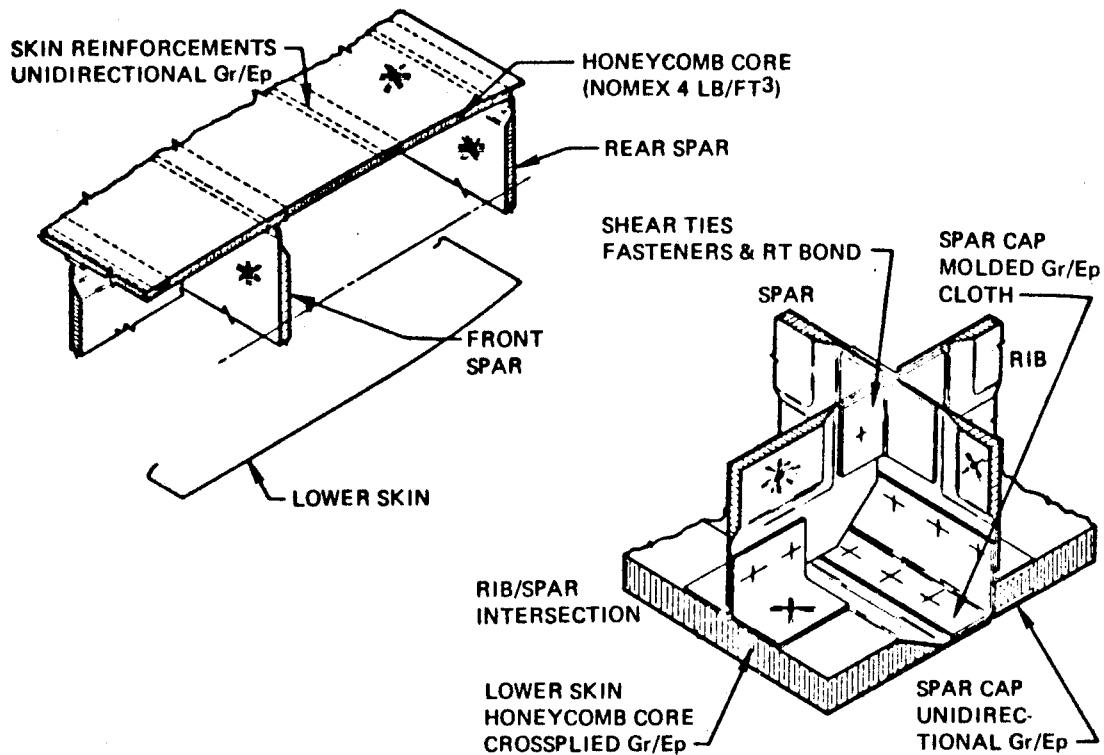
YC-14 Horizontal Stabilizer-Structural Box Details
